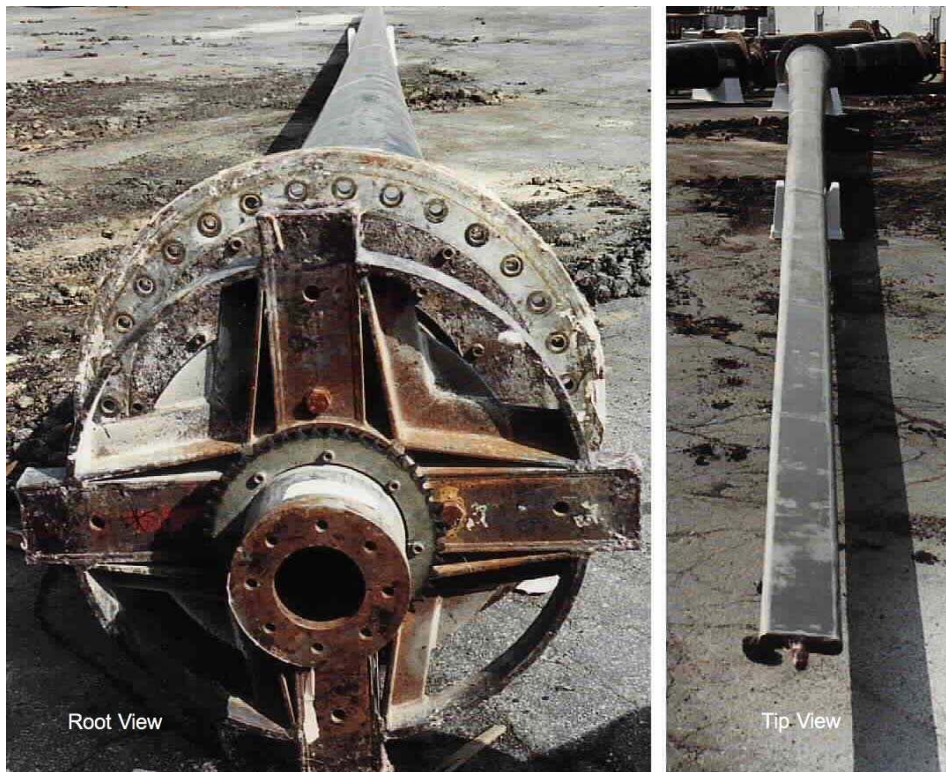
Steel mandrel used for fabricating a tubular main spar.
